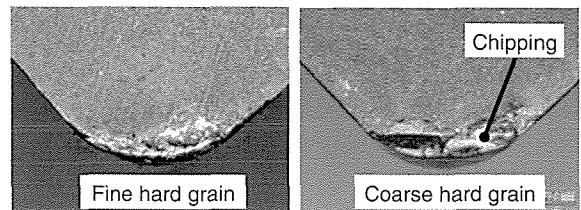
Appearance of Cutting Tool after Stand-Alone Machinability Test
